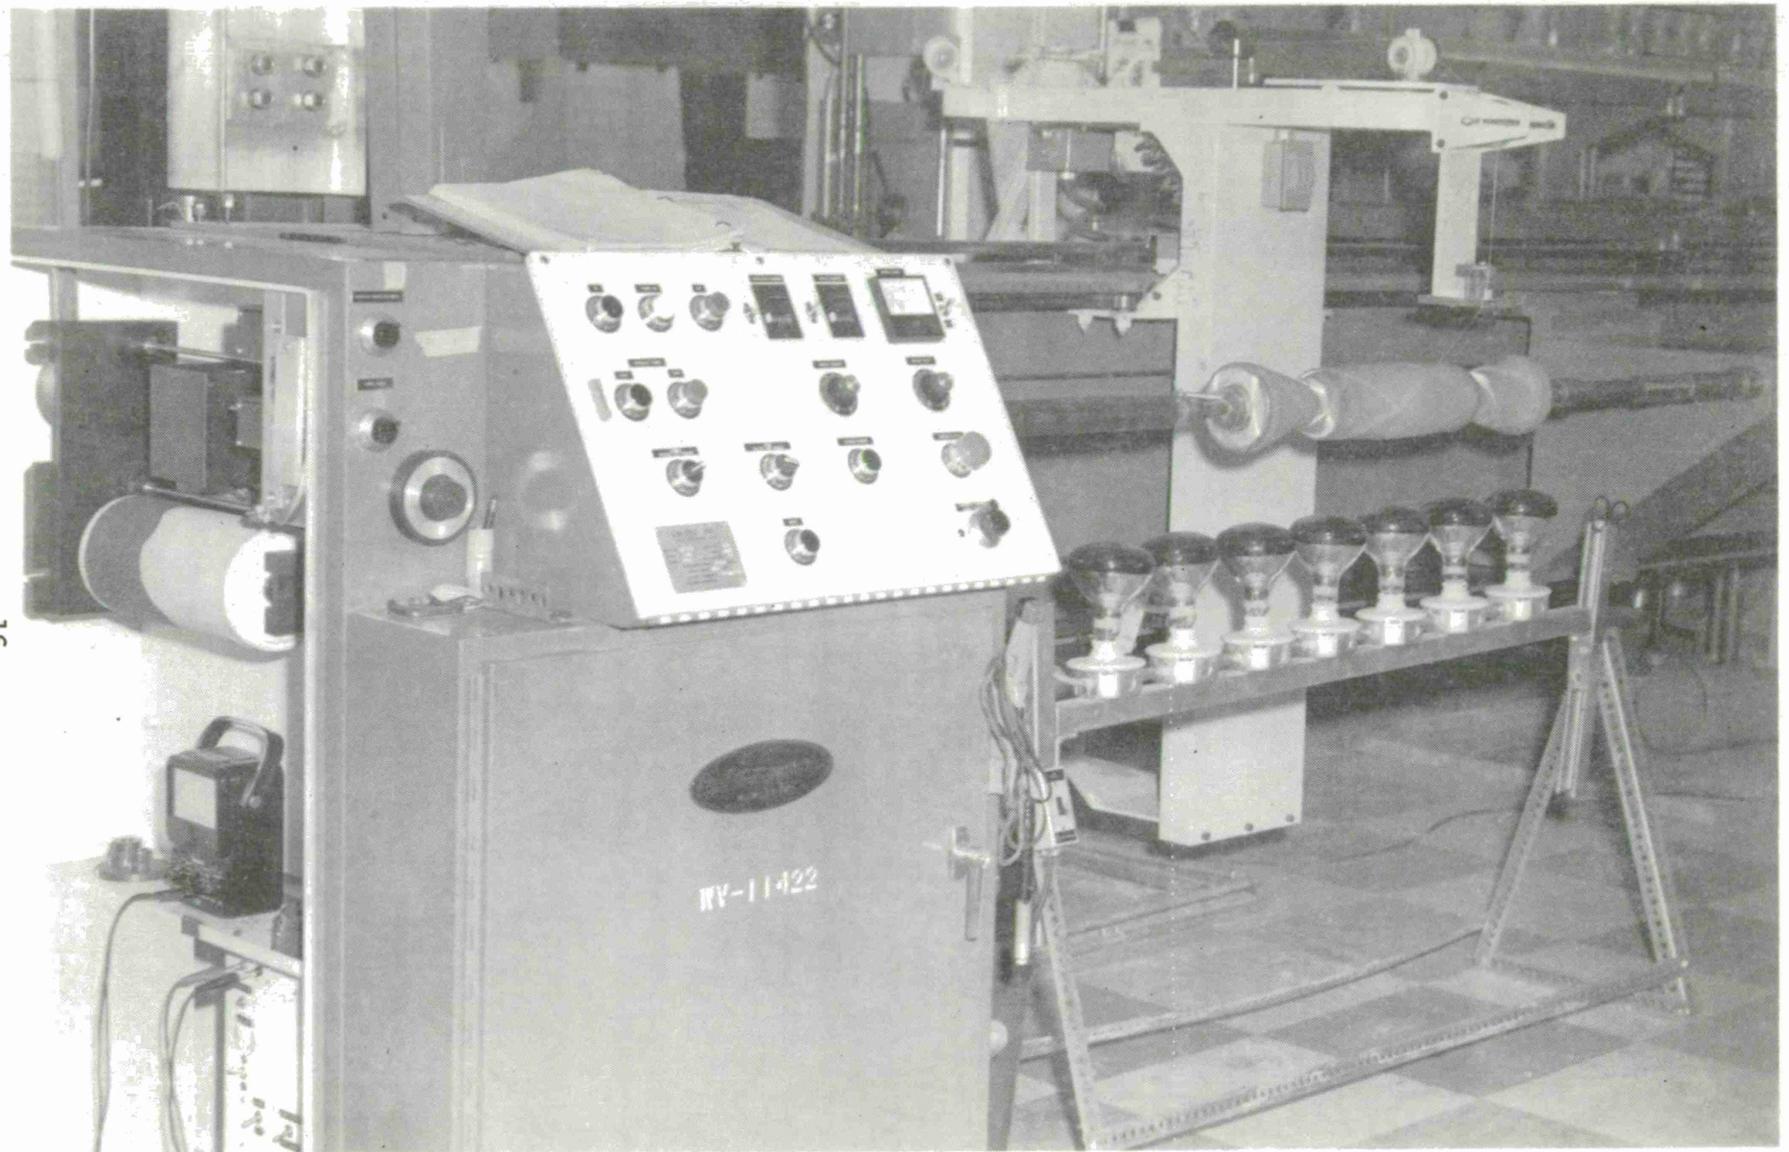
Overall view of the photo controlled, servo driven, filament winding machine.
